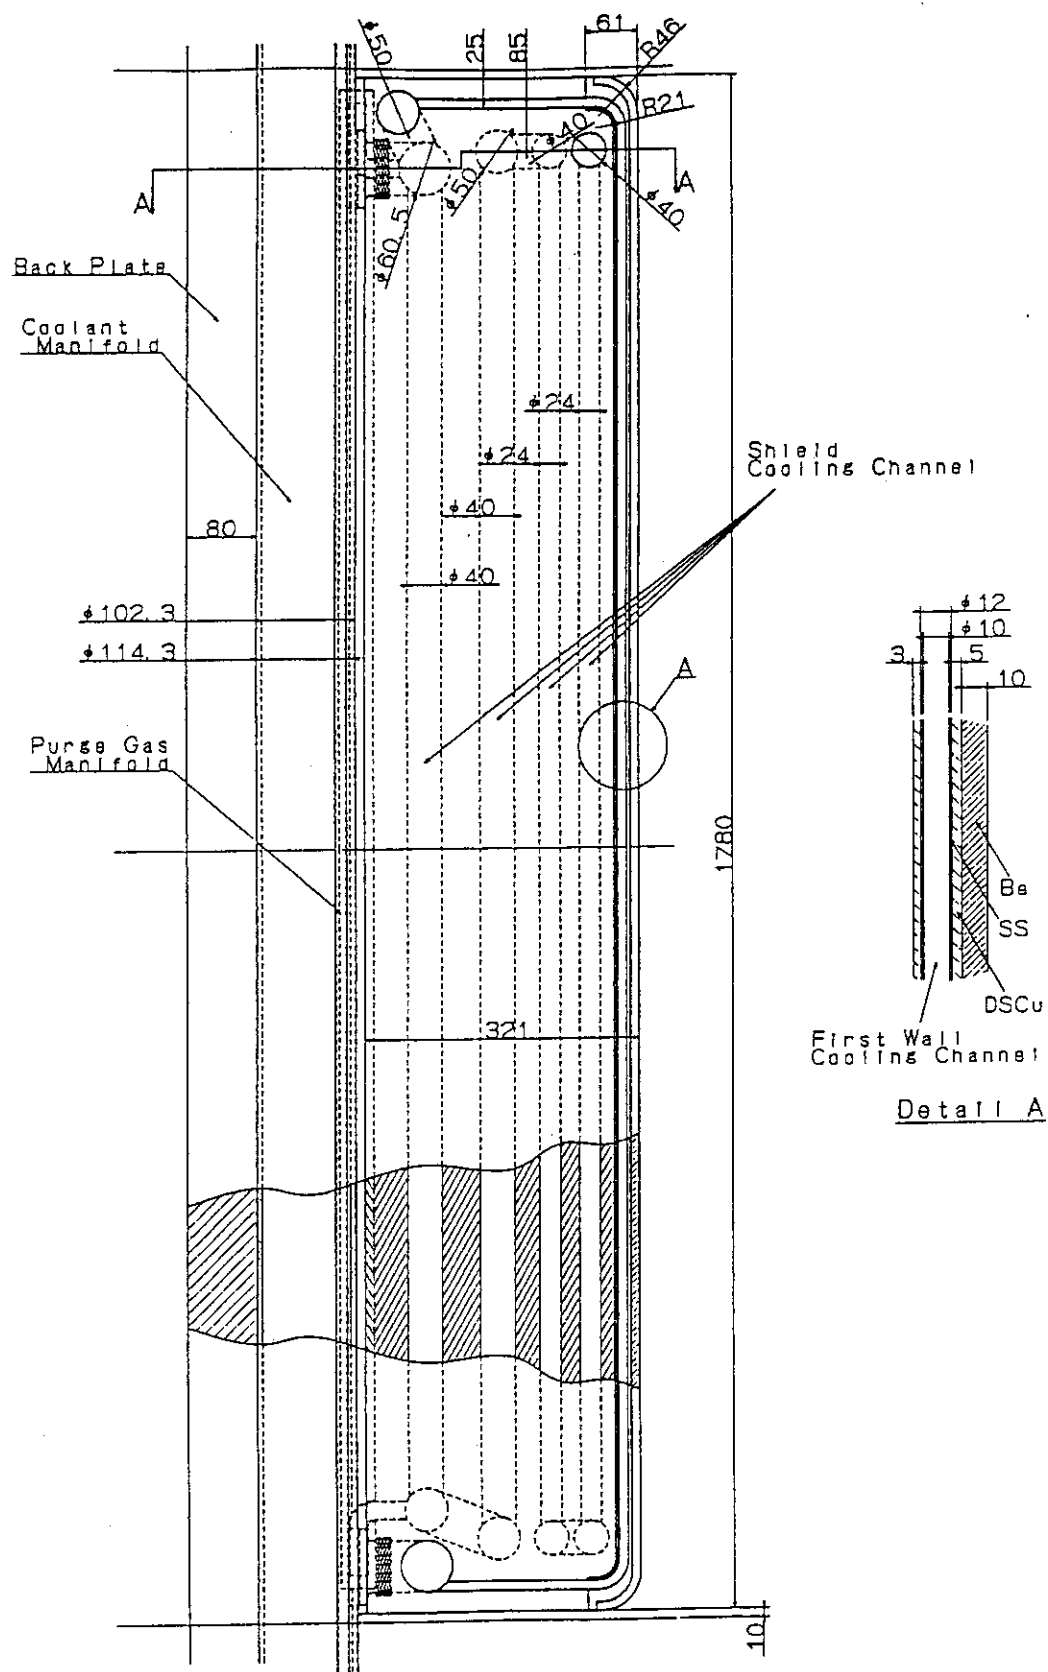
Vertical Cross - Section of Shield Blanket Module (NO.4) with Welded Attachment to Back Plate
